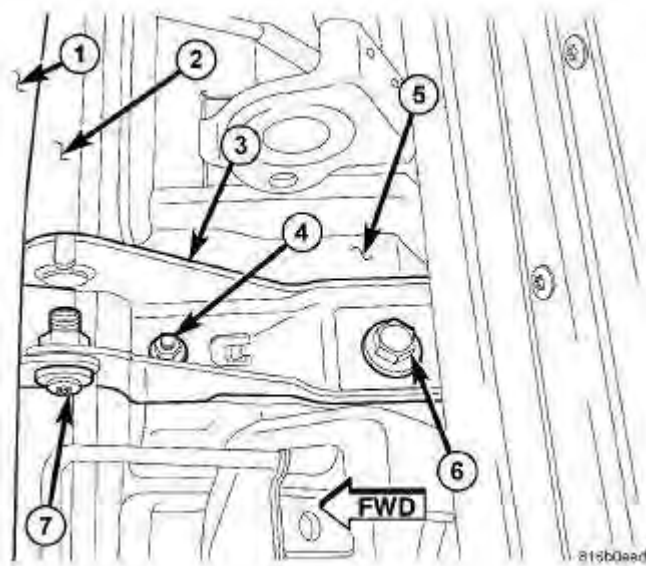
Removing/Installing Rear Center Anchor And Right Outboard Buckle - Mega Cab
